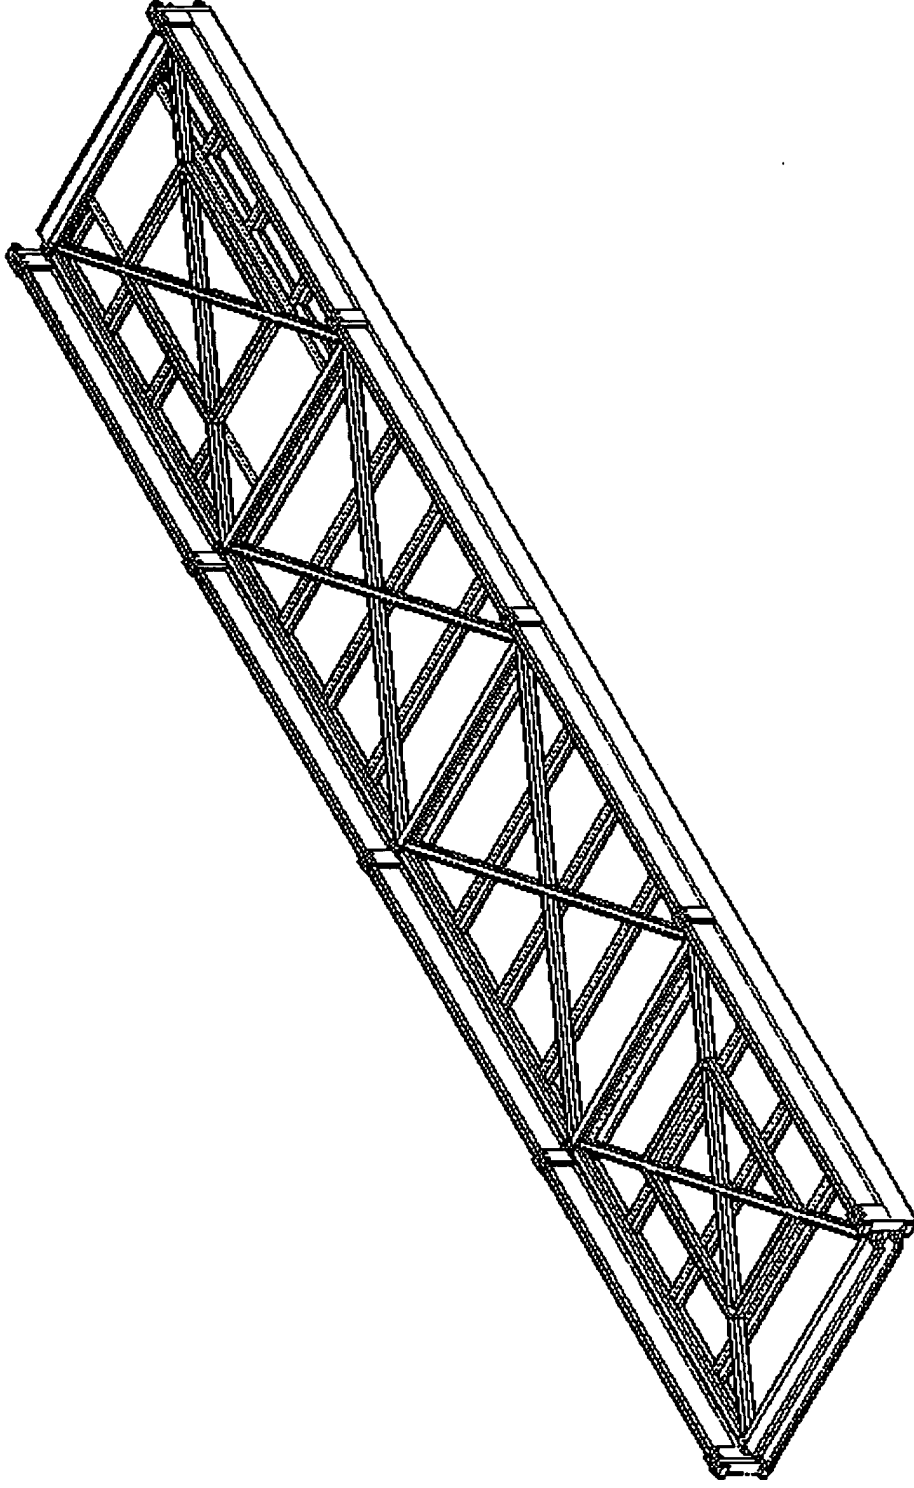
B: Isometric view of a floor frame that contains a front frame and a back frame (40 foot high cube collapsible cargo container)
